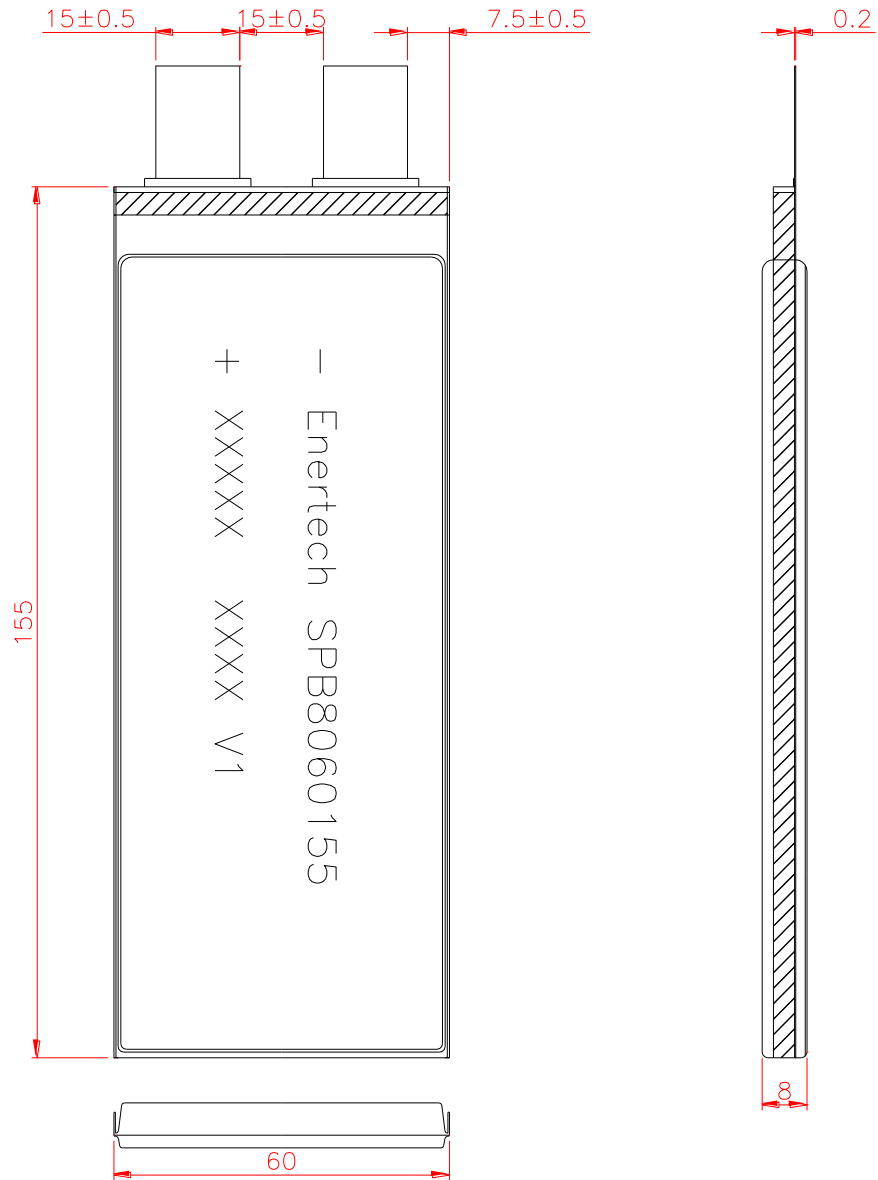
Lithium ion Rechargeable Cell Outline Drawing
